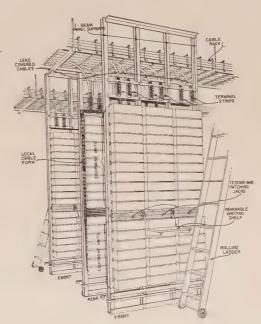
General View Showing Typical Group of Equipment Units Employing Panel Mounting Method
